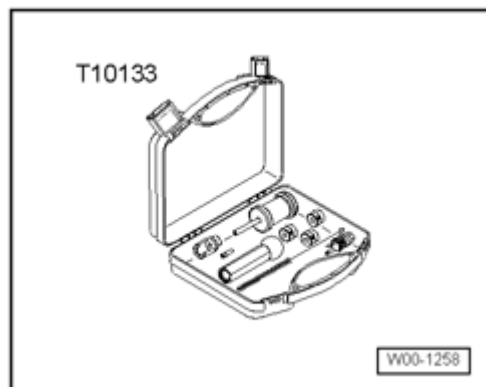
Impact Puller T10133/3 From The Tool Set T10133
